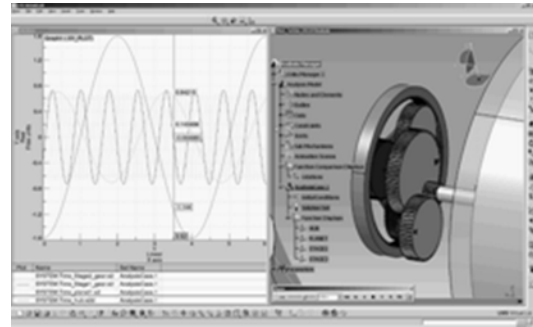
a typical 3-stage gearbox design with planetary gears.
